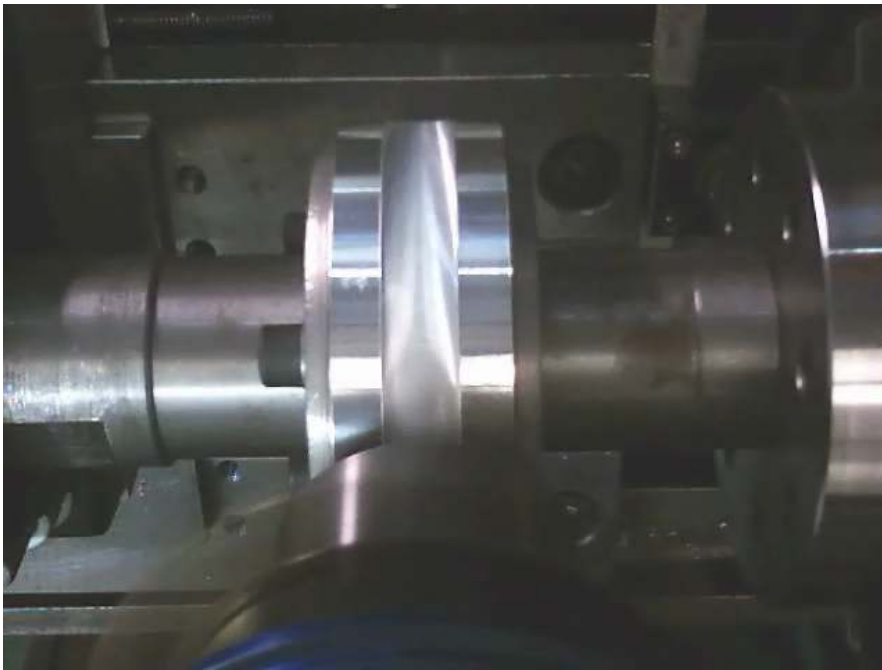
A still image taken from video made during an experimental weld (top view).
